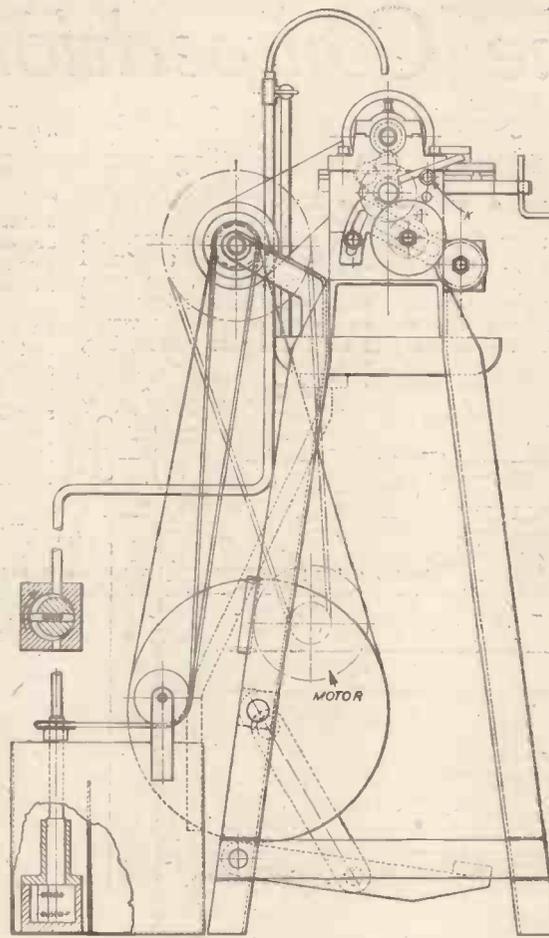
End elevation, showing the arrangement of countershaft, motor and treadle drive, and suds tank and pump.
